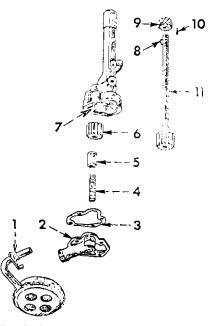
Exploded view of oil pump used in Series 424, 444, 2424 and 2444 non-diesel engines.
